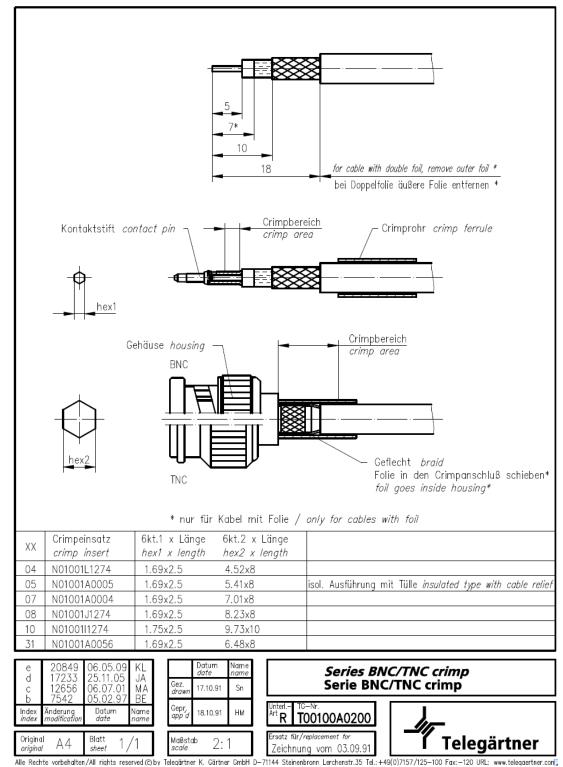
Assembly Instruction BNC, straight, ASIP-2 side
